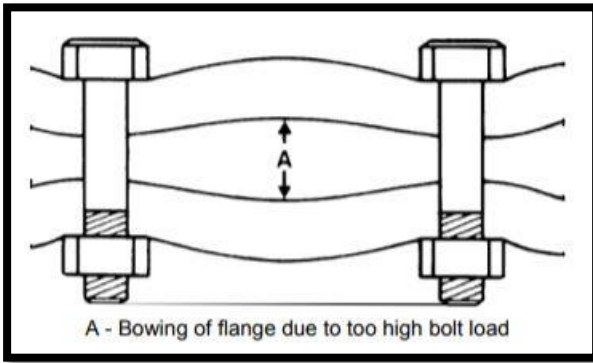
Depiction of Flange Bowing Due to Excessive Bolt Loading
